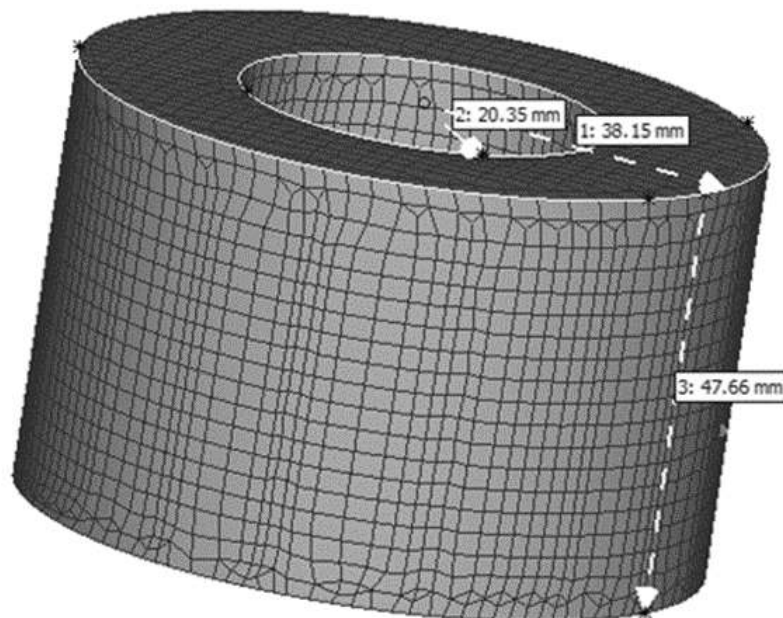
Dimension of the billet after heating up to 1200 °C
